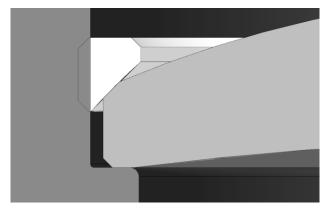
Robust mounting using contact between the lens bevel surface and the ring mounting surface.
